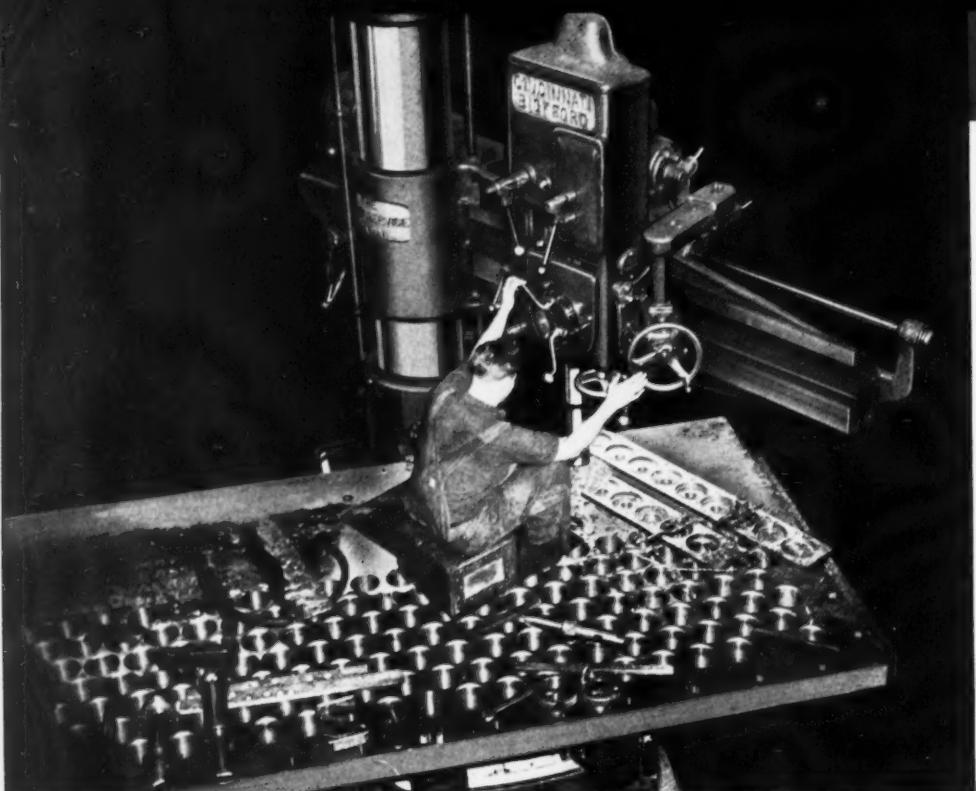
Equipment Used in Drilling Large Numbers of 5-inch Holes through Armor Grating on a Radial Drilling Machine
